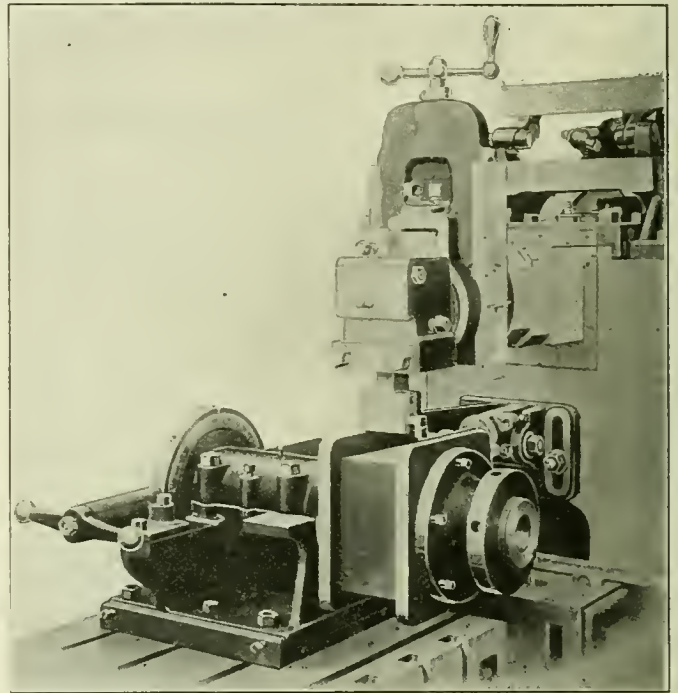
Attachment for Machining Strap Fit in Rod Brasses
